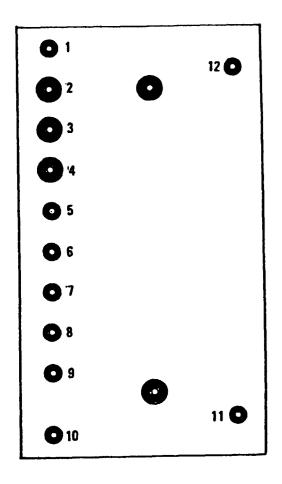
DC-DC Converter Assembly 1A14A3, PN 755017A4100
